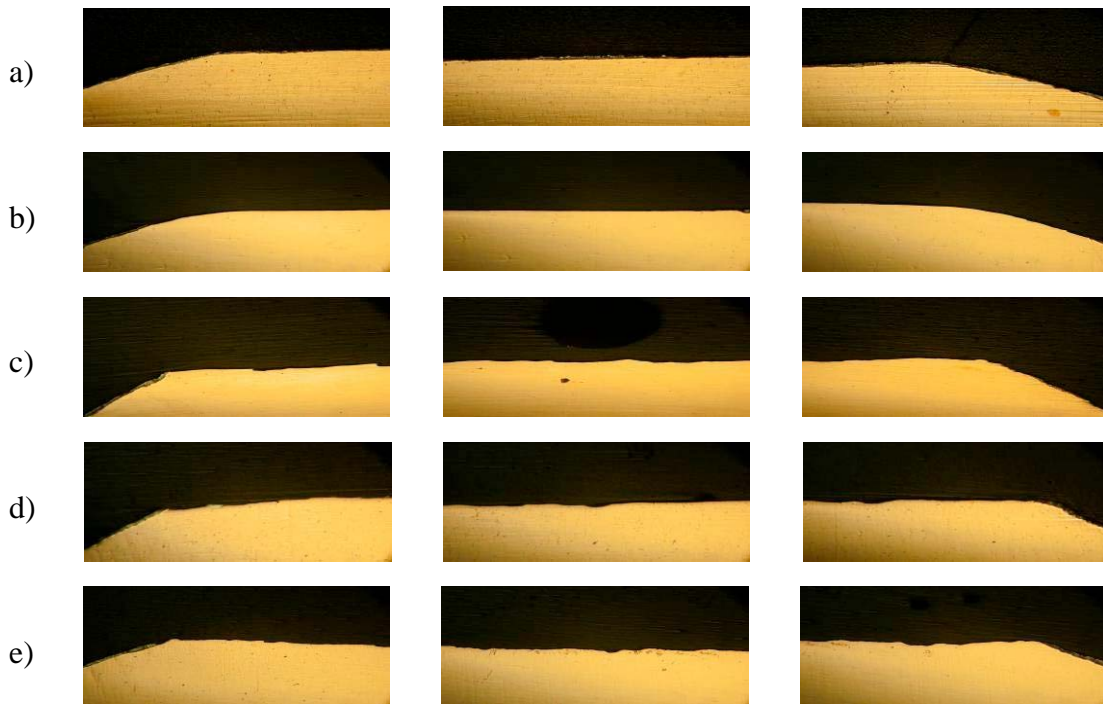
Upper Electrode cross sectioned images from production testing results taken at various weld number intervals: a) 0 welds, b) 500 welds, c) 1000 welds, d) 3000 welds, e) 5000 welds.
